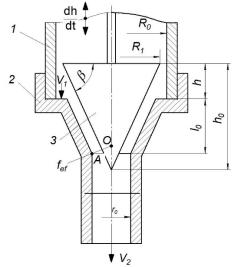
Calculation scheme of the feeder of the adaptronic dosing module with a conical valve for regulating the flow of liquid products: 1 – measuring container; 2 – nozzle; 3 – cone valve
